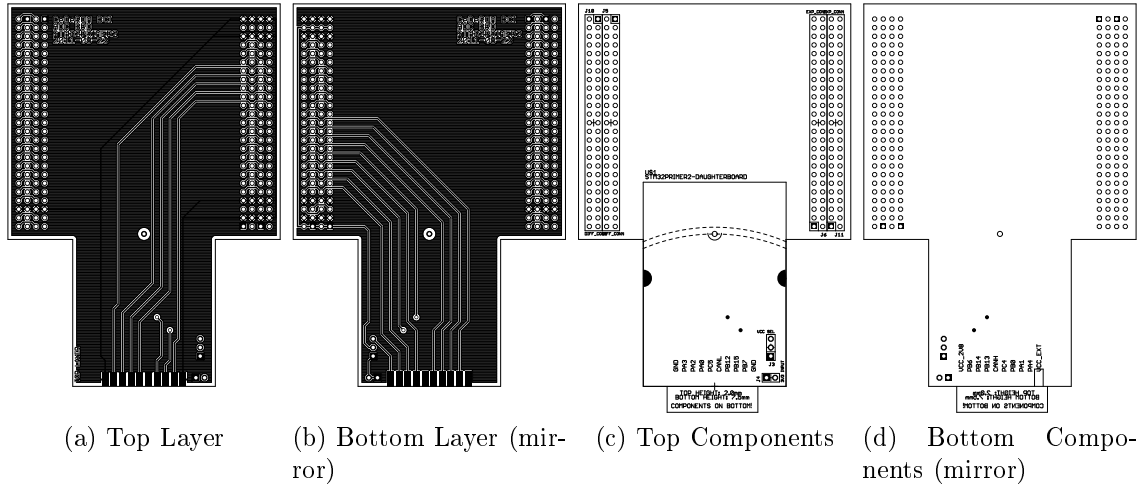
CeDeROM BCI Stm32Primer2 Adapter Board PCB design.
